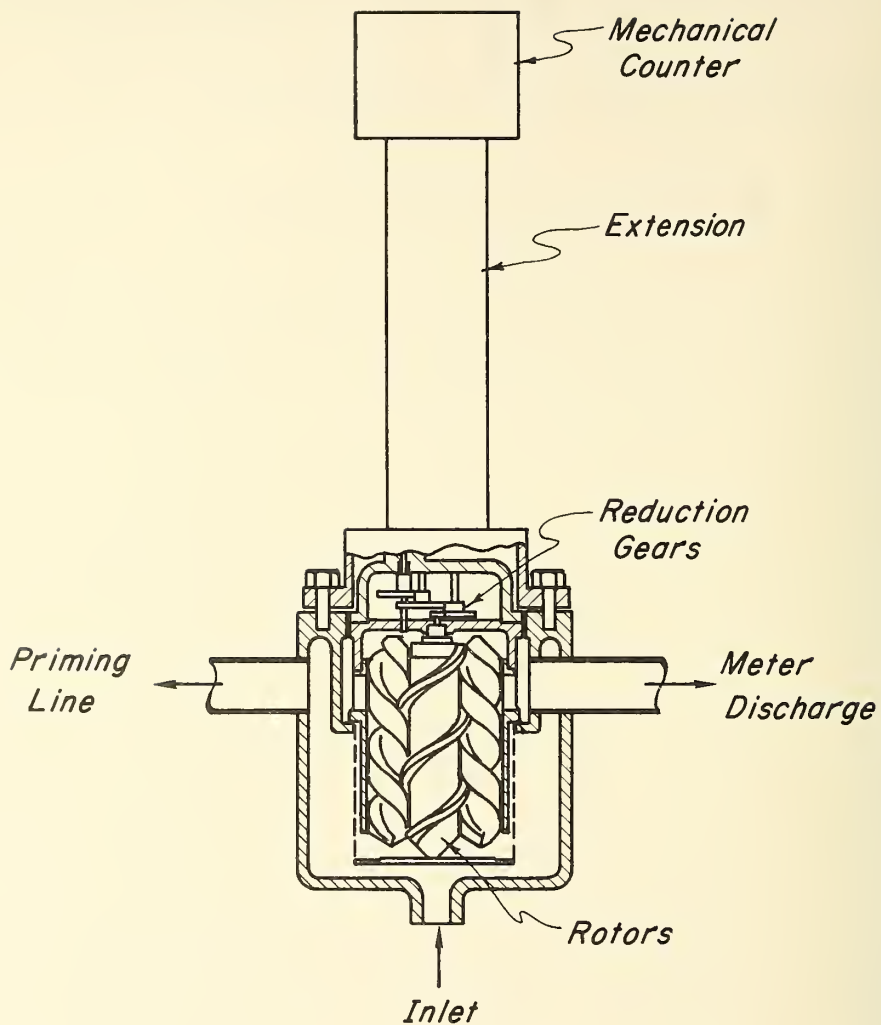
C.      Screw Impeller Meter with a Mechanical Counter.
